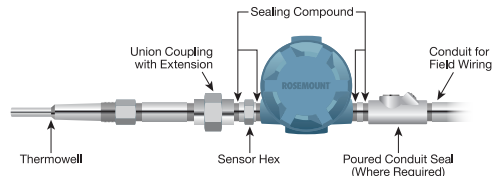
Typical Mounting with Drain Seal
